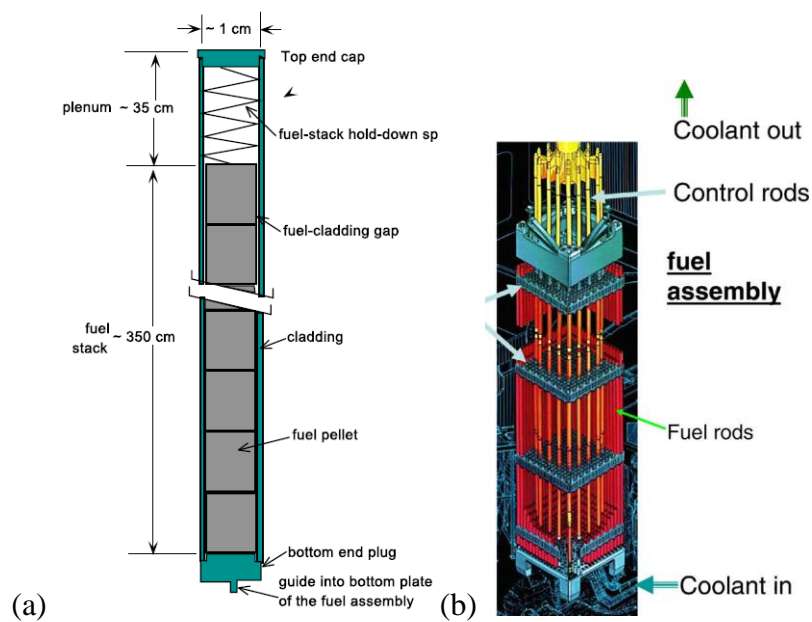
Schematic of fuel assembly for PWR. (a) cross sectional view of a fuel element. (b) Assembly of fuel rods [11]
